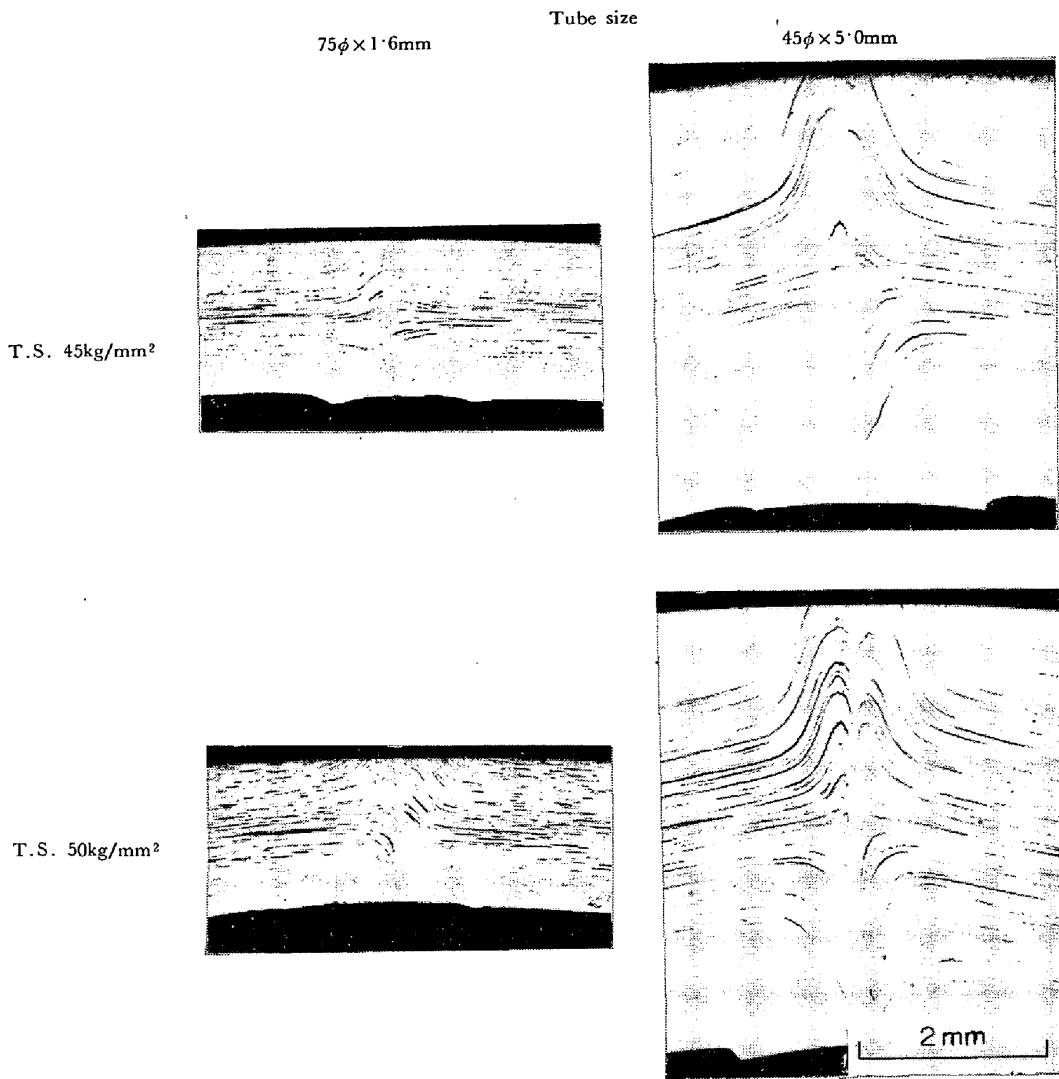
Photograph of banded structure at welded part of specimens.
